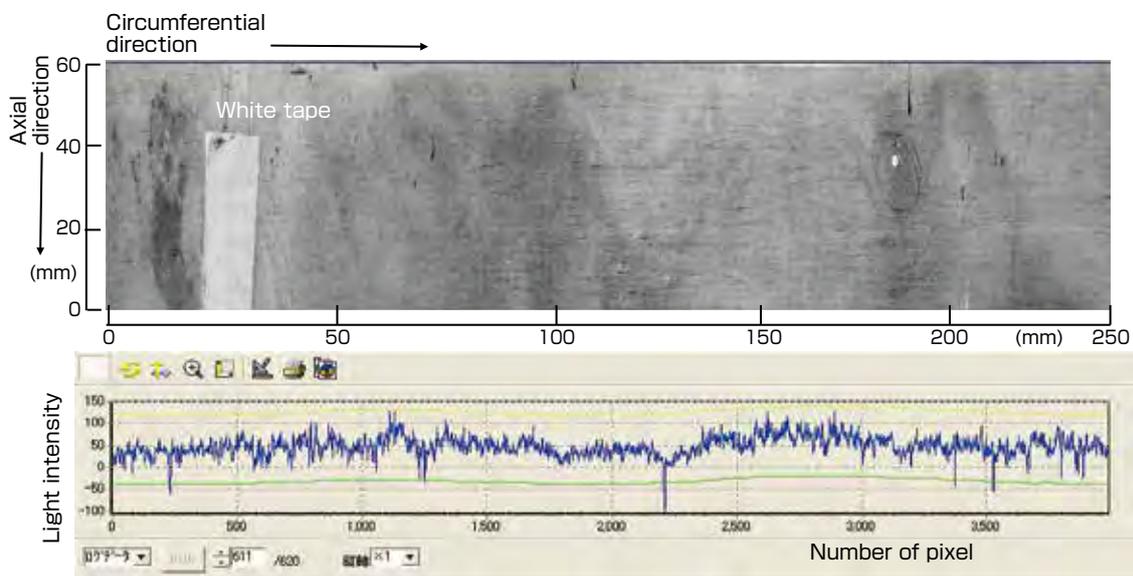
Inspection system for inner wall surfaces of machined holes
